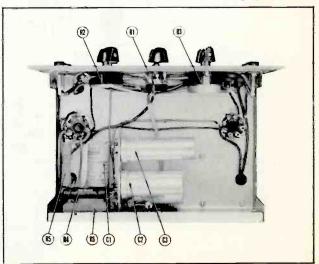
Bottom view of Impedance Measuring Device, without Null Indicator.
